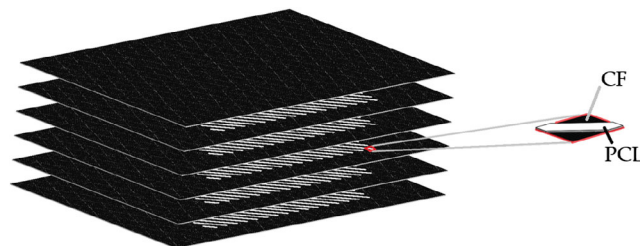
Exploded view of the composite laminate, five interlayers with printed diagonal zones, and the desired macrostructure (magnified section).
